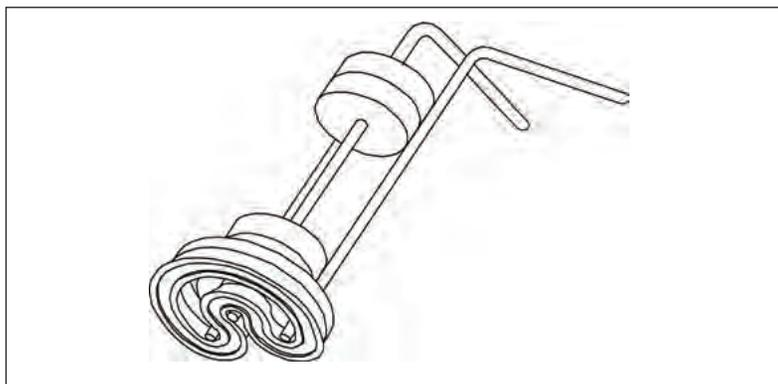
Three-leg installation tool for polyurethane and rubber seals
